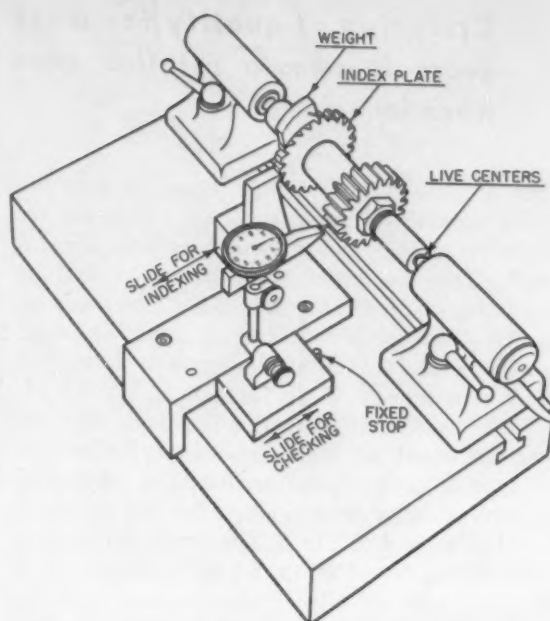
Good investment for checking gears, a 36-tooth index plate is inspection time saver.
